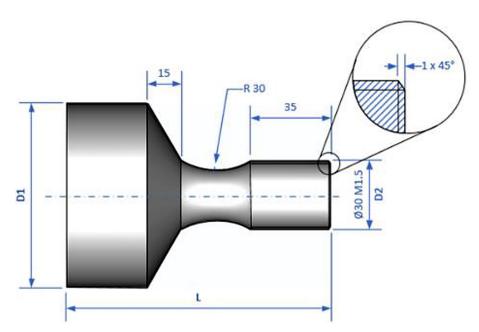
Sample of cylindrical part. Thread at the end (35 mm length)
